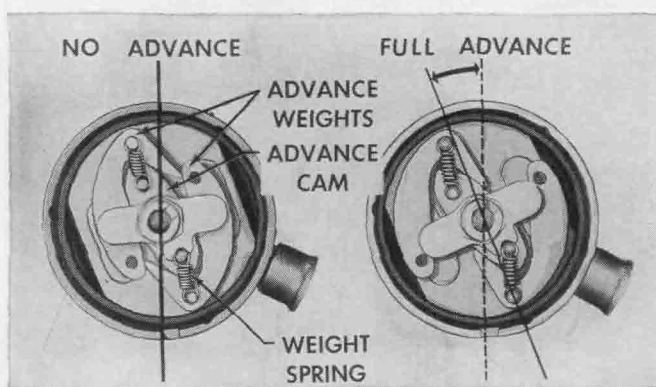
Centrifugal-advance mechanism showing initial- and maximum-advance positions. (Delco-Remy Division of General Motors Corporation)
